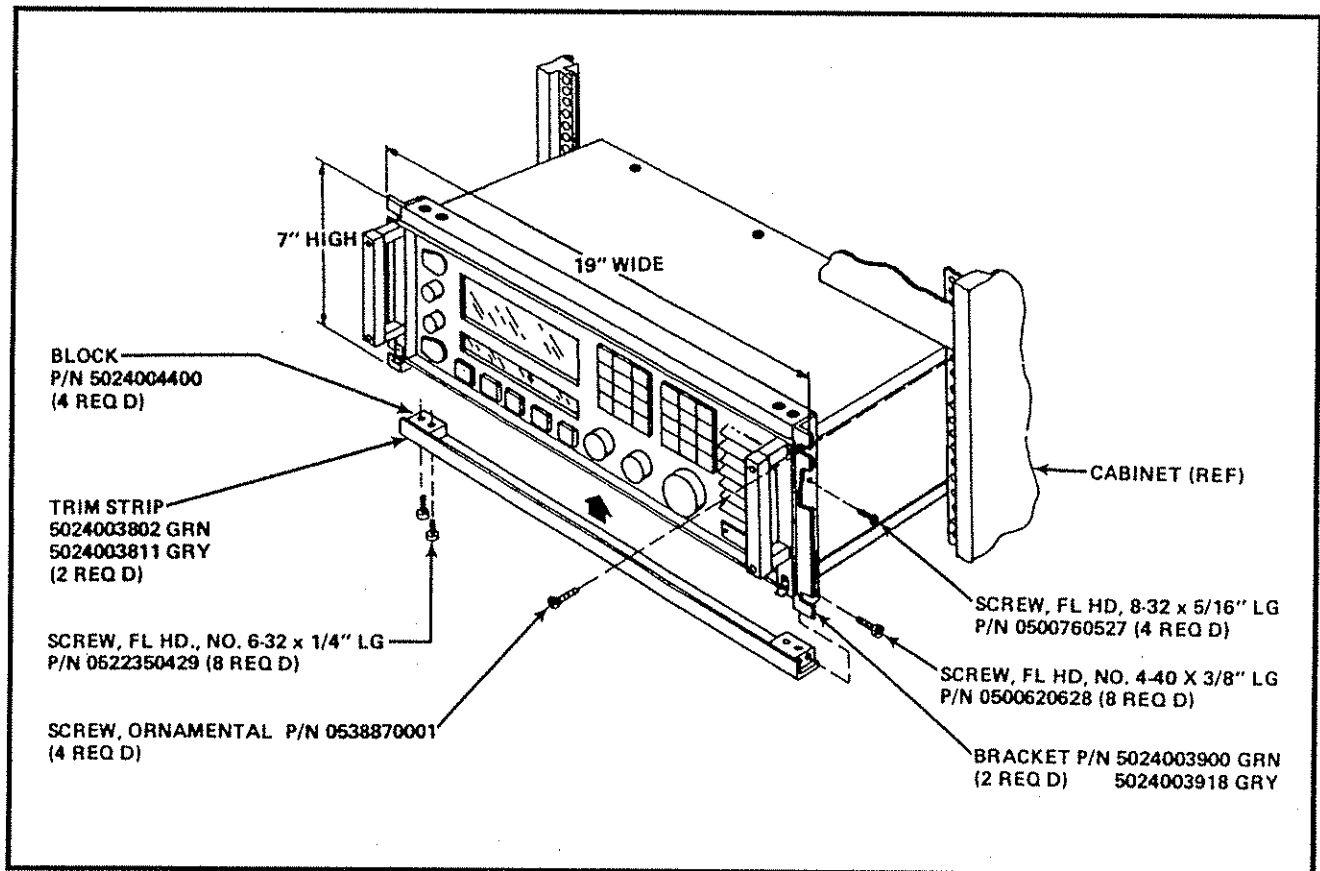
Installation of RCU-9310 in Equipment Rack.
